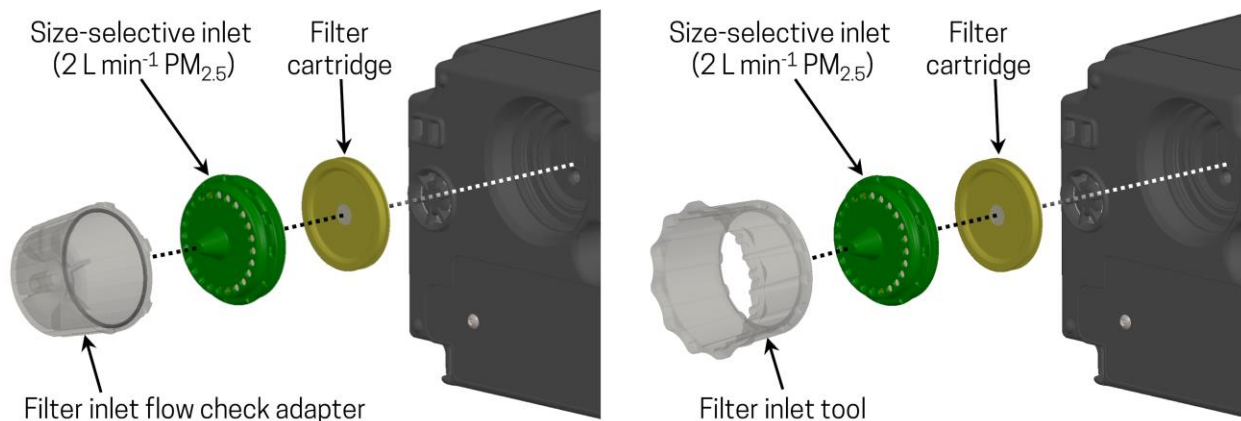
A diagram illustrating how the size-selective inlet and filter cartridge should be installed in the HHB filter socket. The 2 L min⁻¹ PM_{2.5} inlet is shown here as an example. Use either the filter inlet flow check adapter (left) or the filter inlet tool (right) to screw down and tighten the size-selective inlet.
